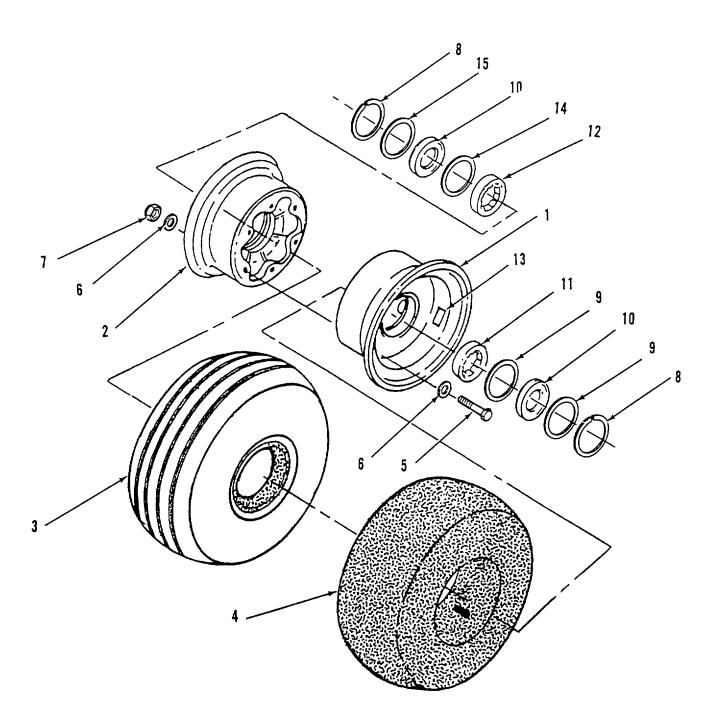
Wheel Assembly, P/N 1730-EG-116
